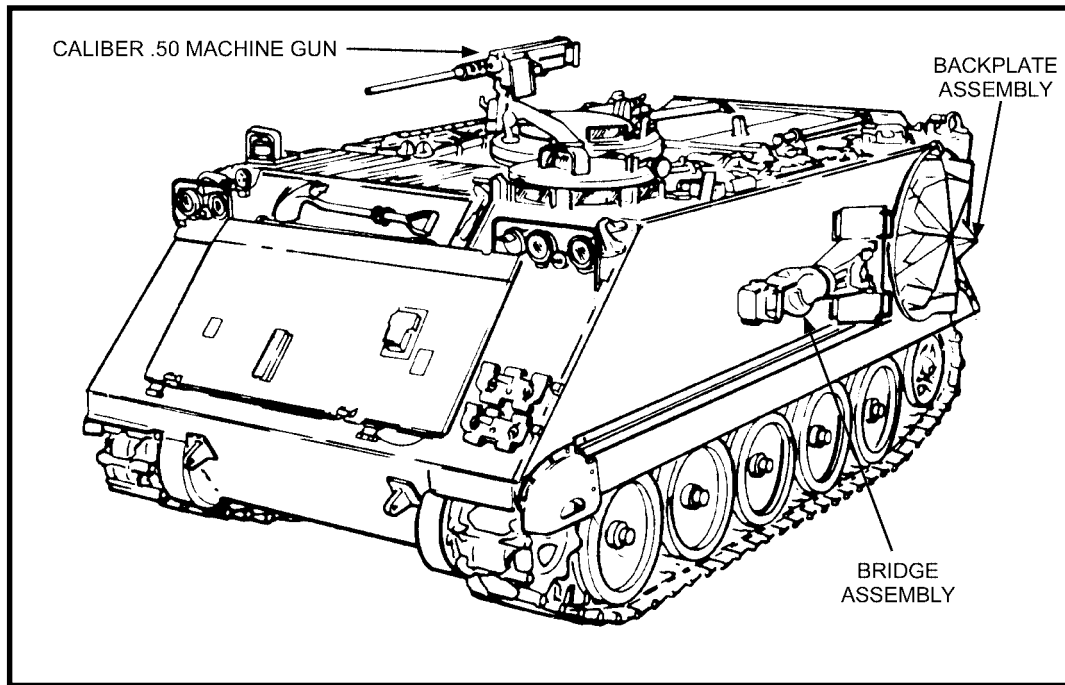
Mortar carrier, M106, left front view (caliber .50 machine gun mounted on cupola).
